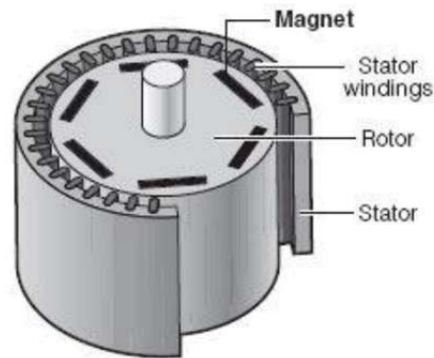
Permanent magnet machine exploded diagram (from [2.74])
